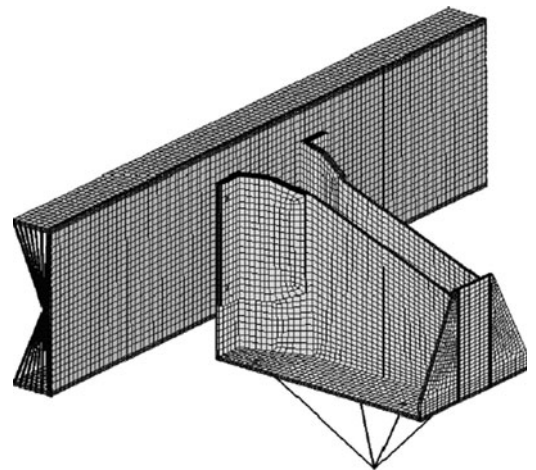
FE model of a spare wheel carrier consisting of frame, bracket and idealized wheel
